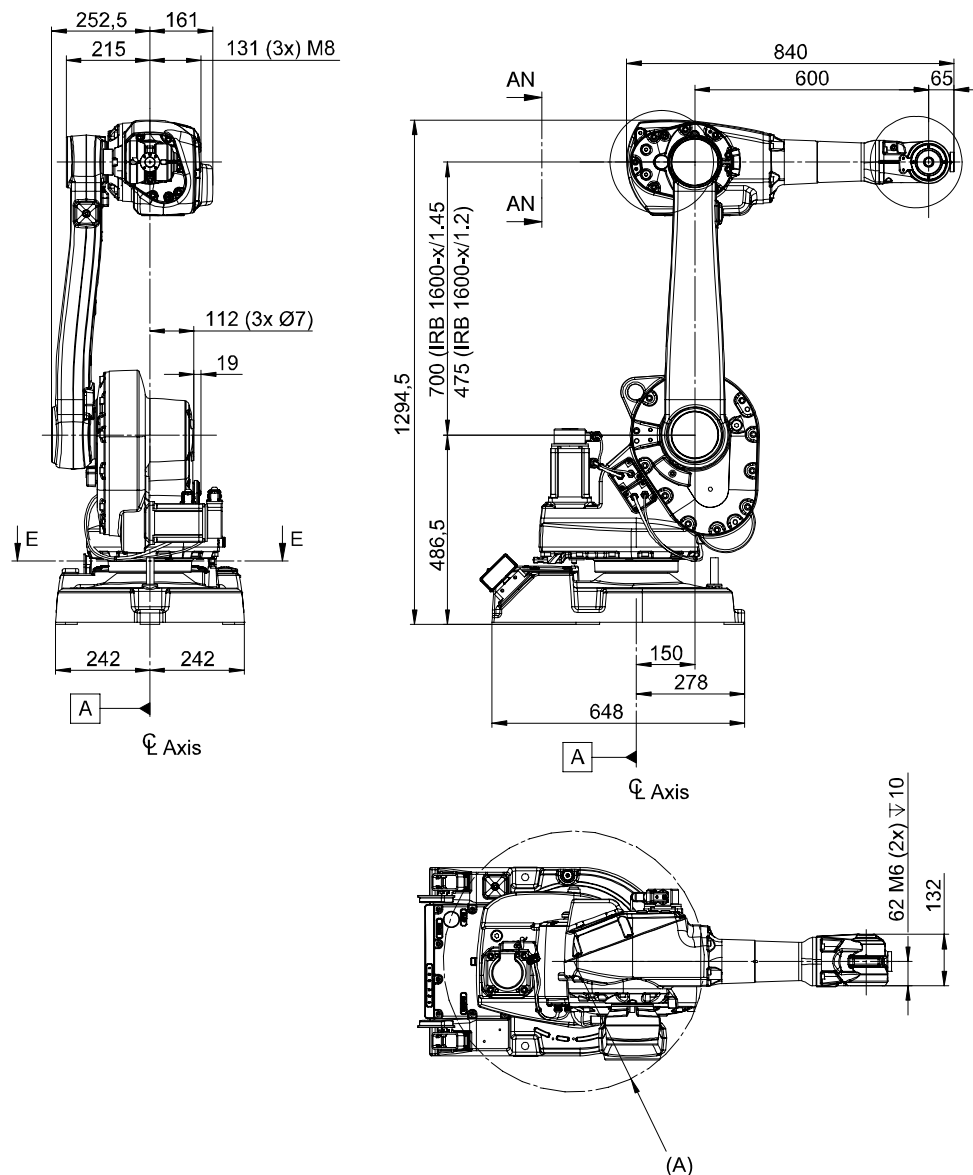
View of the manipulator from the back, side and above (dimensions in mm).
